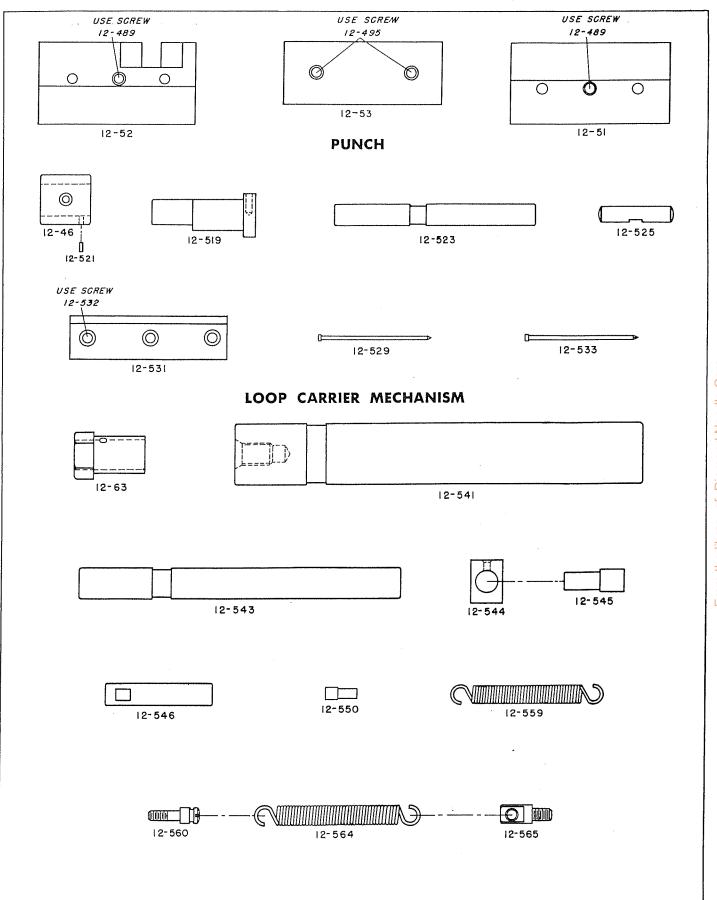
Punch and Loop Carrier Mechanism Parts (approximately ½ size)
